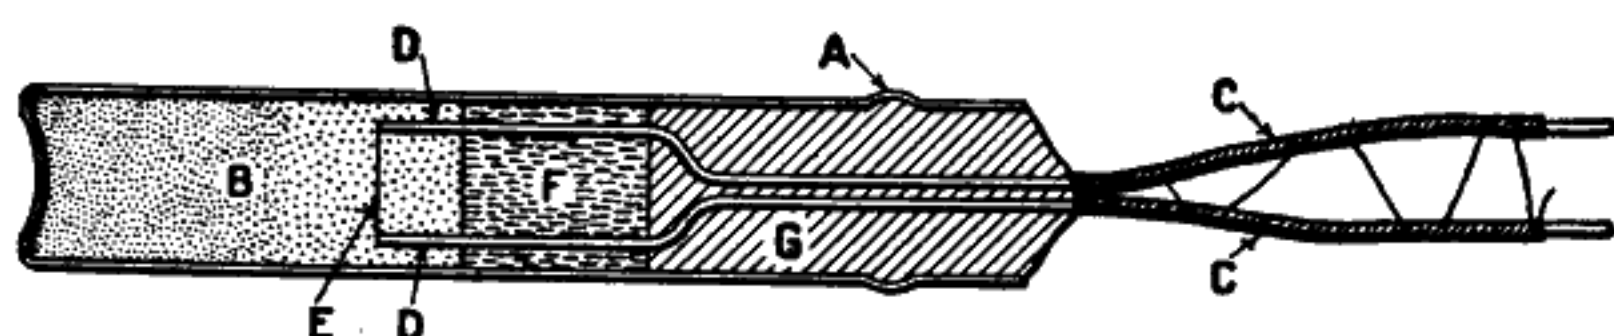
Electric Blasting Cap (Section). "A" is a copper shell, having a corrugation thrown out from the inside, which holds the filling material more firmly in place; "B" is the chamber containing the explosive charge; "C" the insulated copper wires entering the cap; "D" the bare ends of the copper wires projecting through the plug into the charge; "E" the small wire or "bridge" soldered to and connecting the two ends of the copper wires, which is heated by the electric current; "F" the composition plug holding the wires firmly in place; "G" the filling and water-proofing material.
